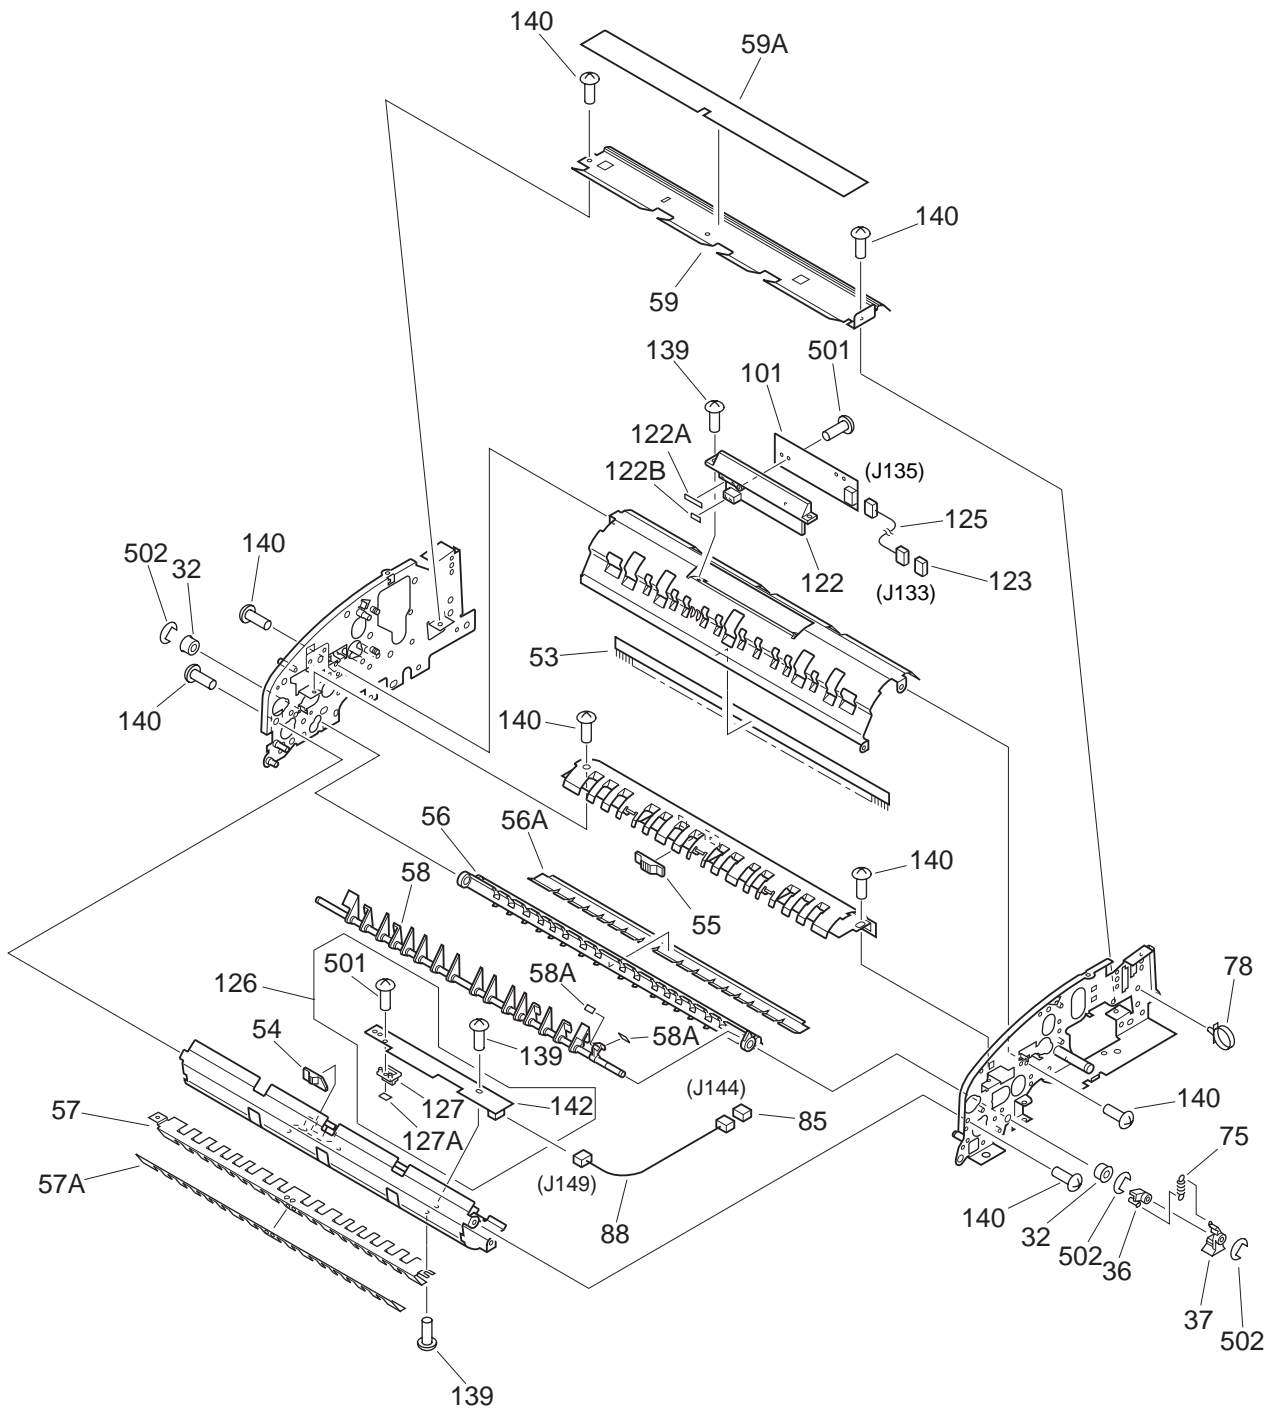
SEPARATION MOTOR ASSEMBLY
